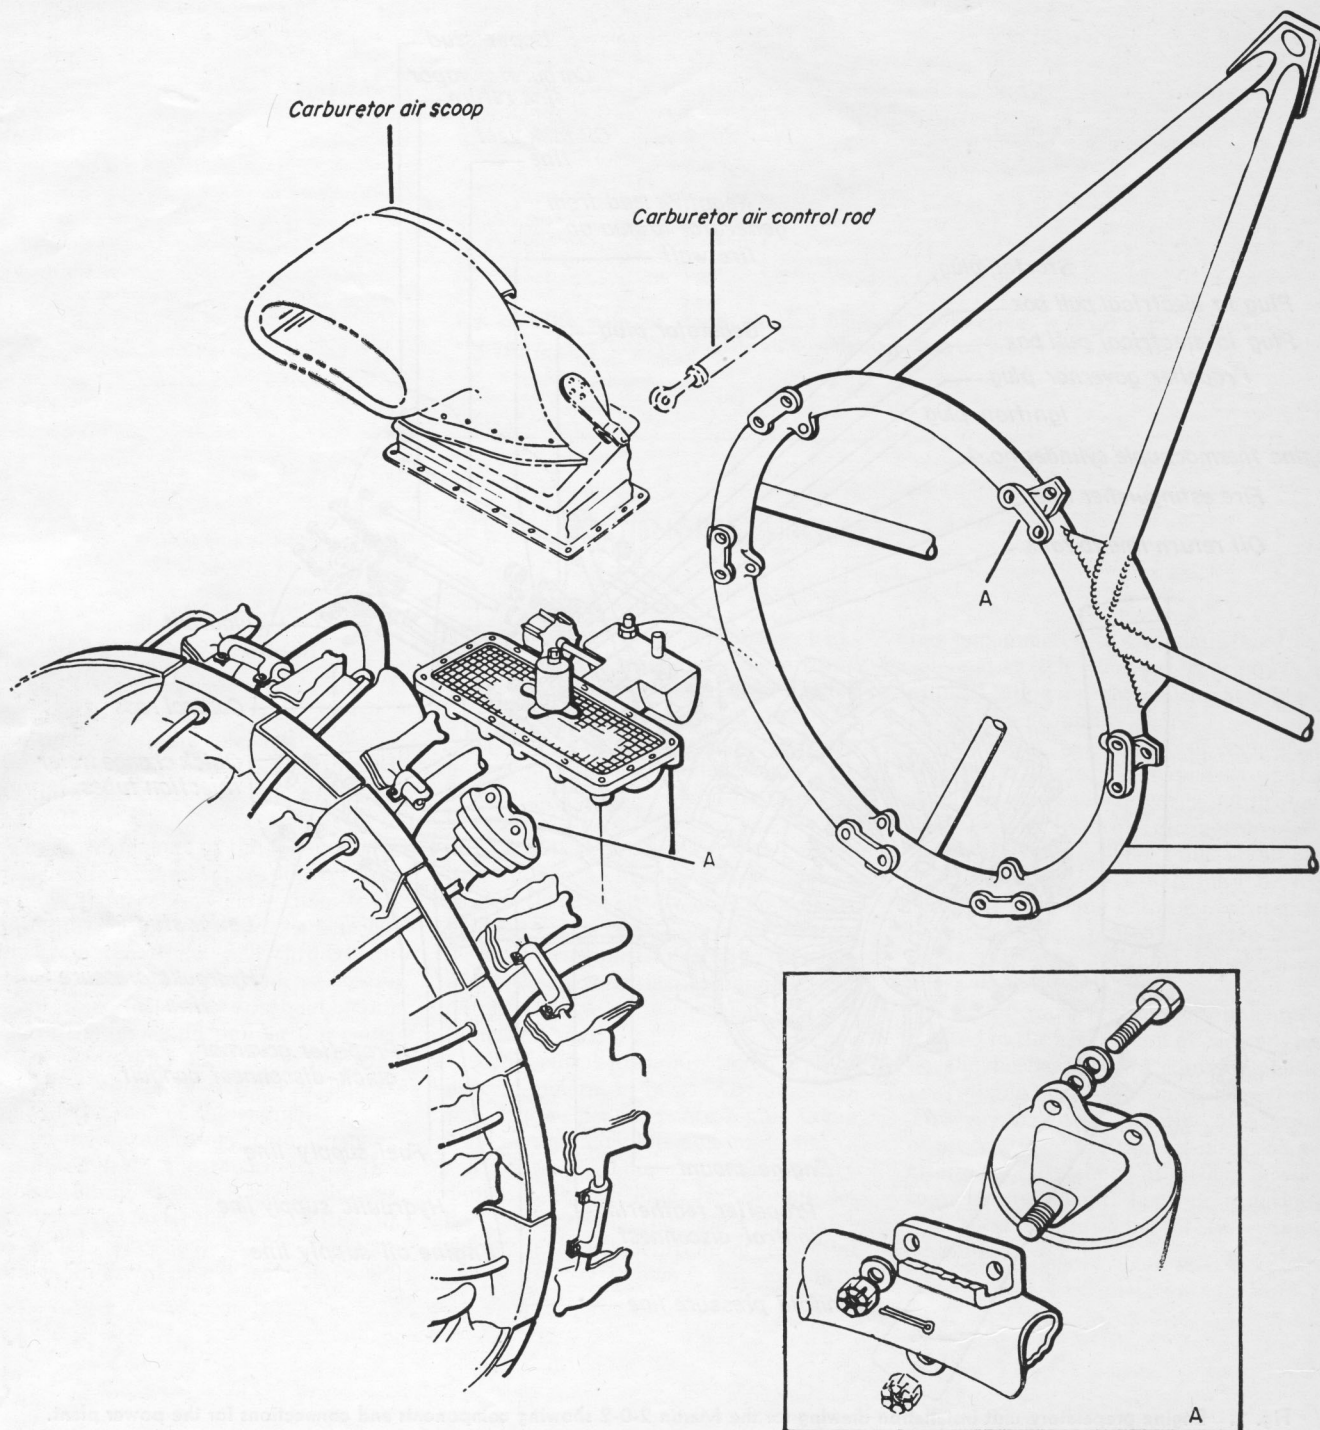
Engine mount of the Martin 2-0-2 showing fitting attachment details A in the inset at the lower right.
